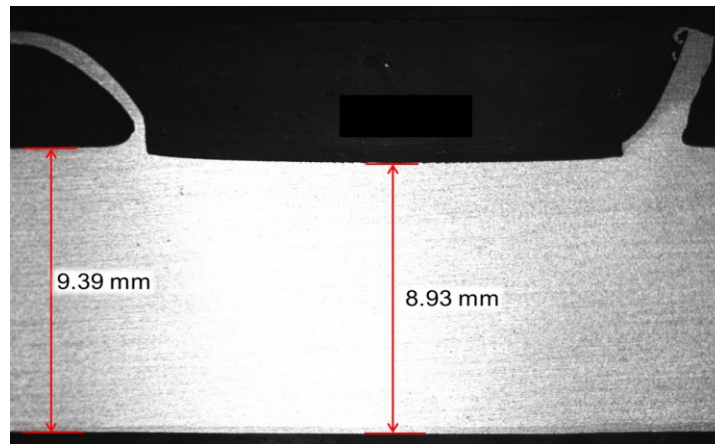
Weld profile of A6TF specimens with a significantly large toe flash defect
